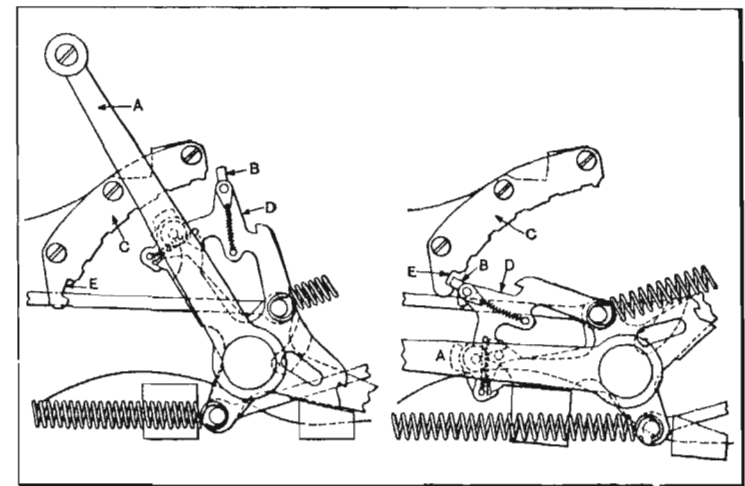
Full-stroke Mechanism to Prevent Starting the Operating Lever and not Completing its Movement
